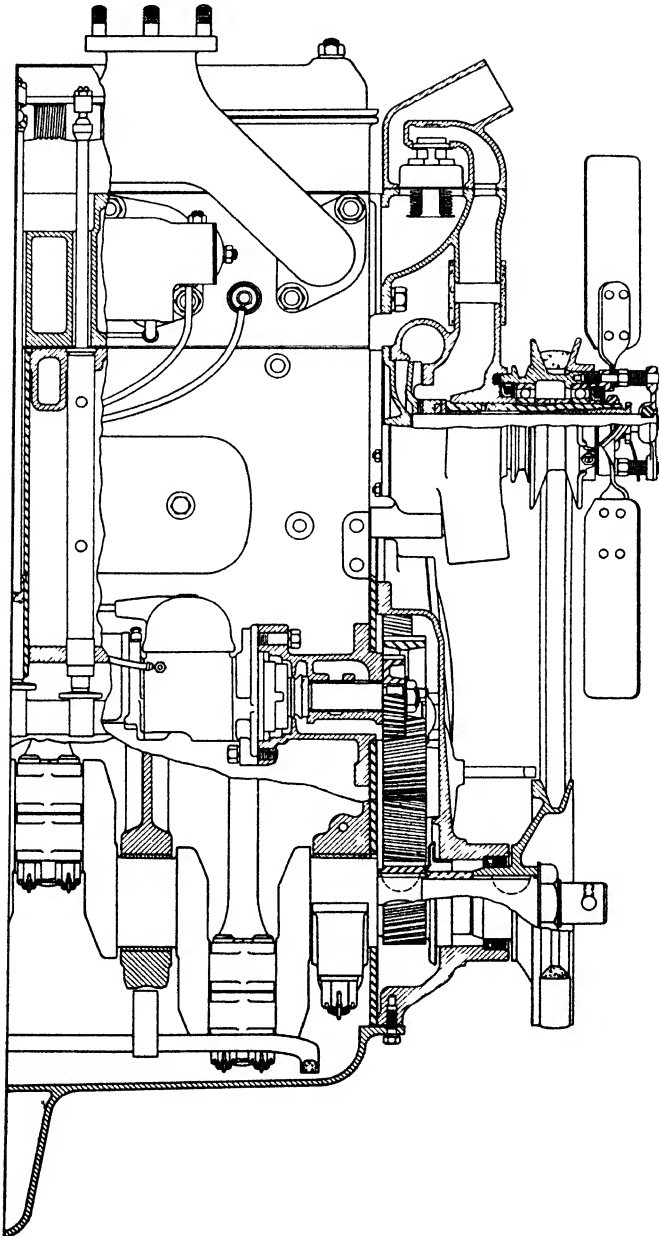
B.—LONGITUDINAL SECTION OF I.H.C. ENGINE, FRONT HALF.
